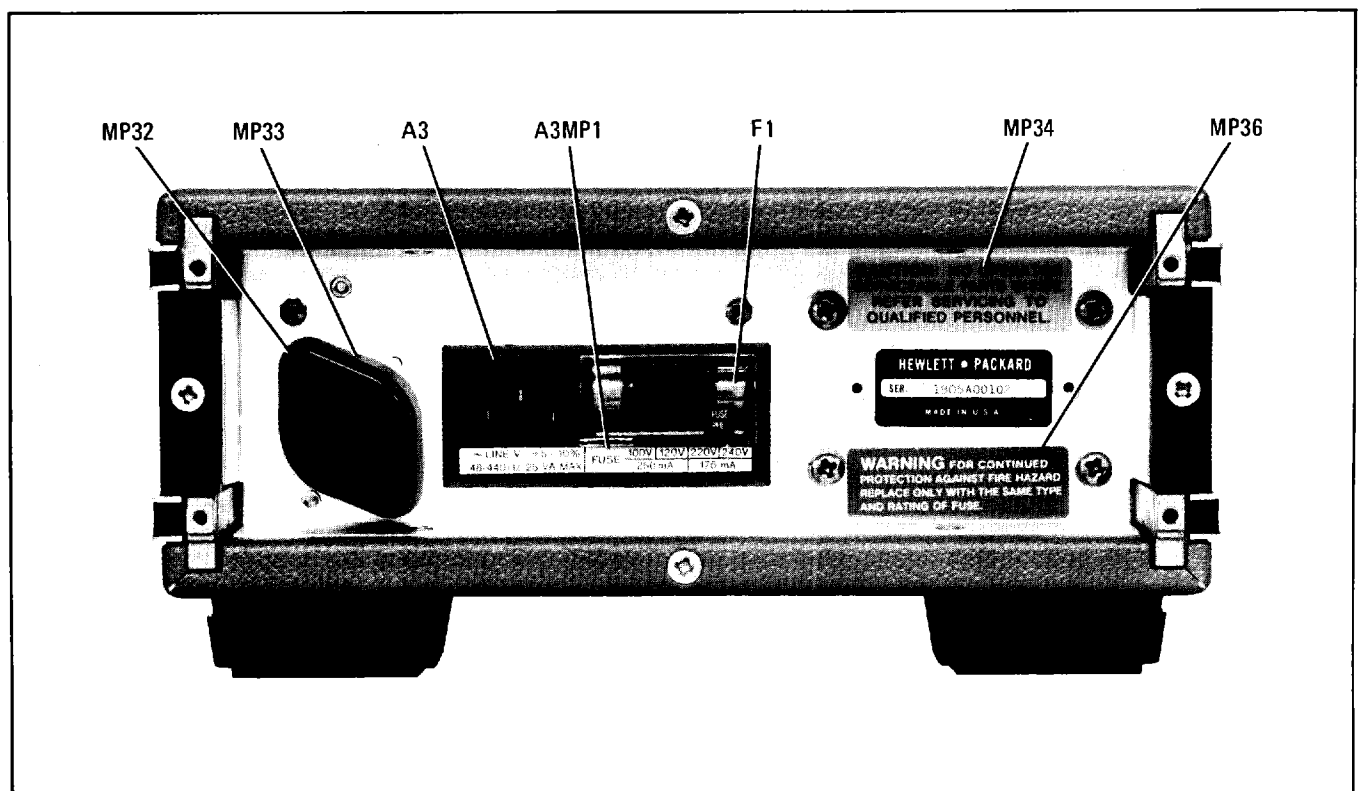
Chassis and Mechanical Parts Identification Rear Panel
